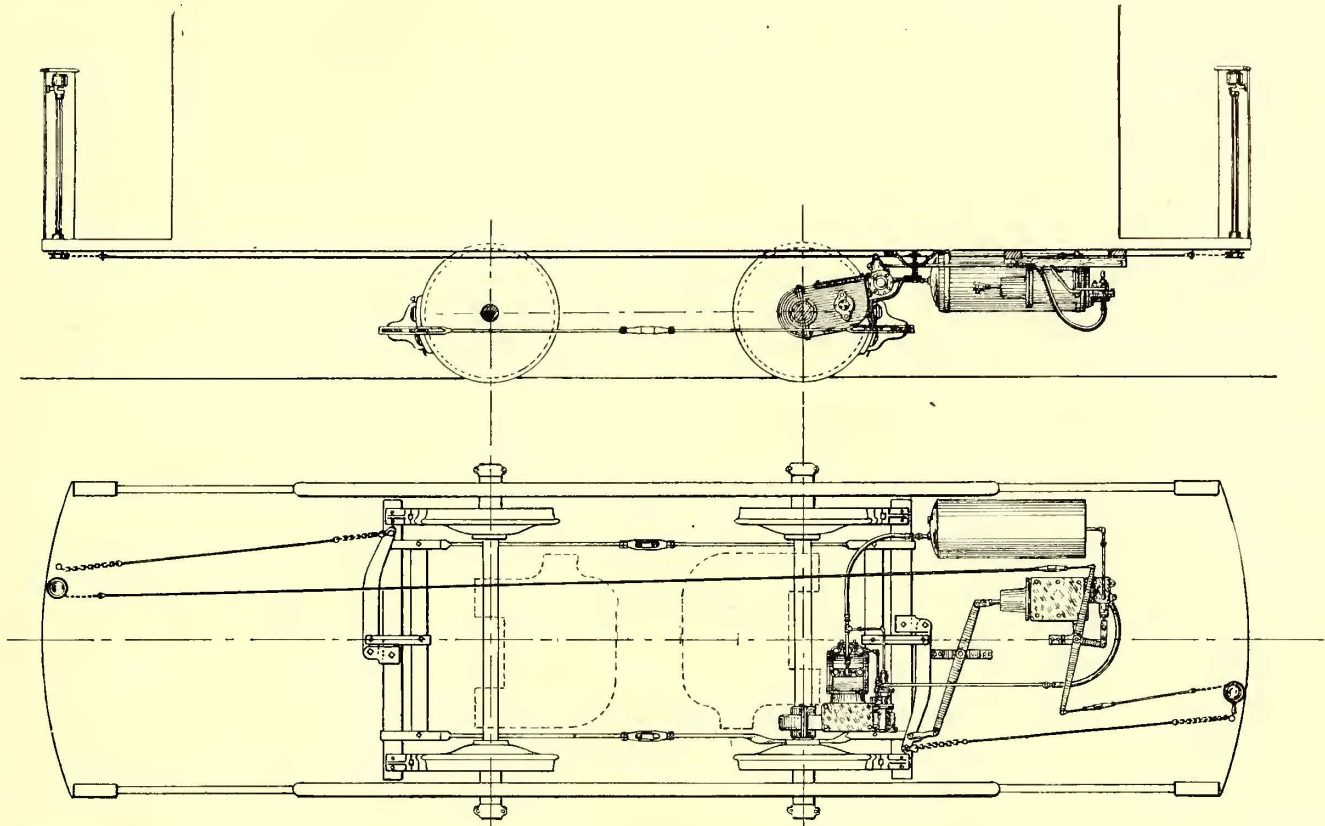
PLAN AND SIDE ELEVATION OF AIR BRAKE EQUIPMENT
